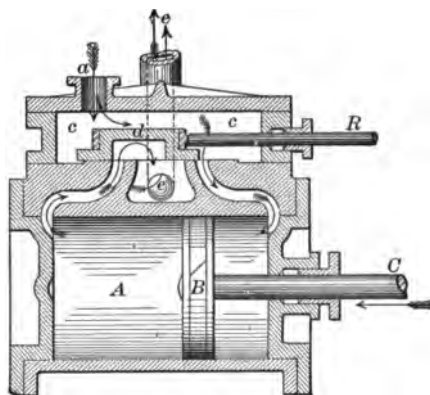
CYLINDER OF STEAM ENGINE.
